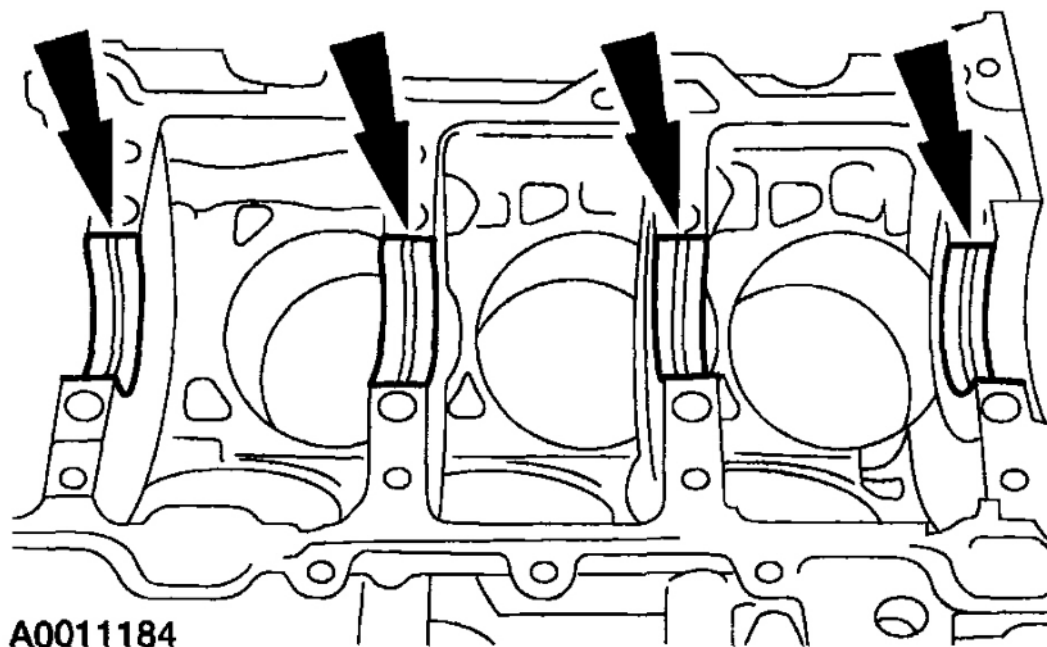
Removing/Installing Upper Crankshaft Main Bearings At Cylinder Block
